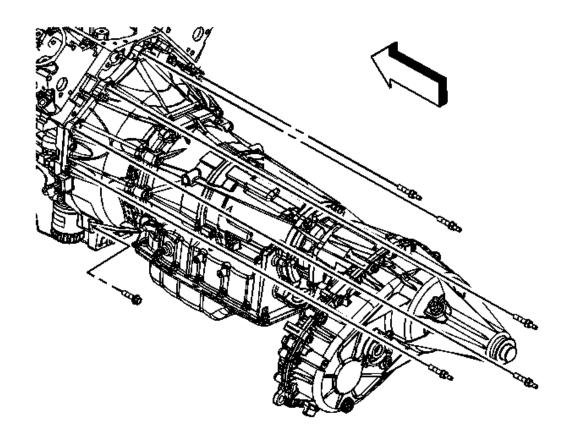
View Of Transmission Bolts/Studs Courtesy of GENERAL MOTORS CORP.
